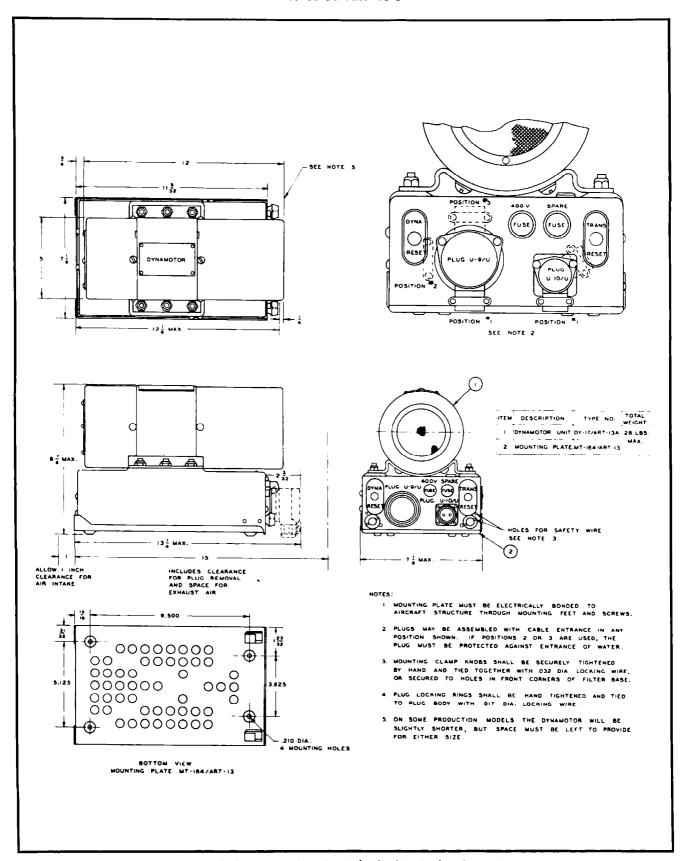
Dynamotor Unit DY-17/ART-13A—Outline Dimensions
